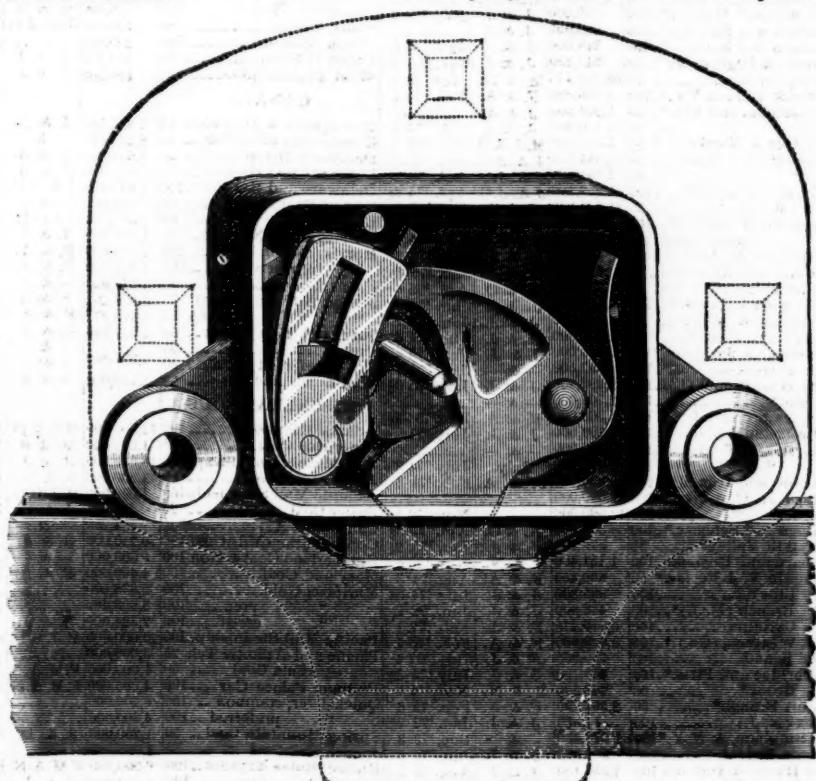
VIEW OF LOCK WITH FACE PLATE REMOVED.
